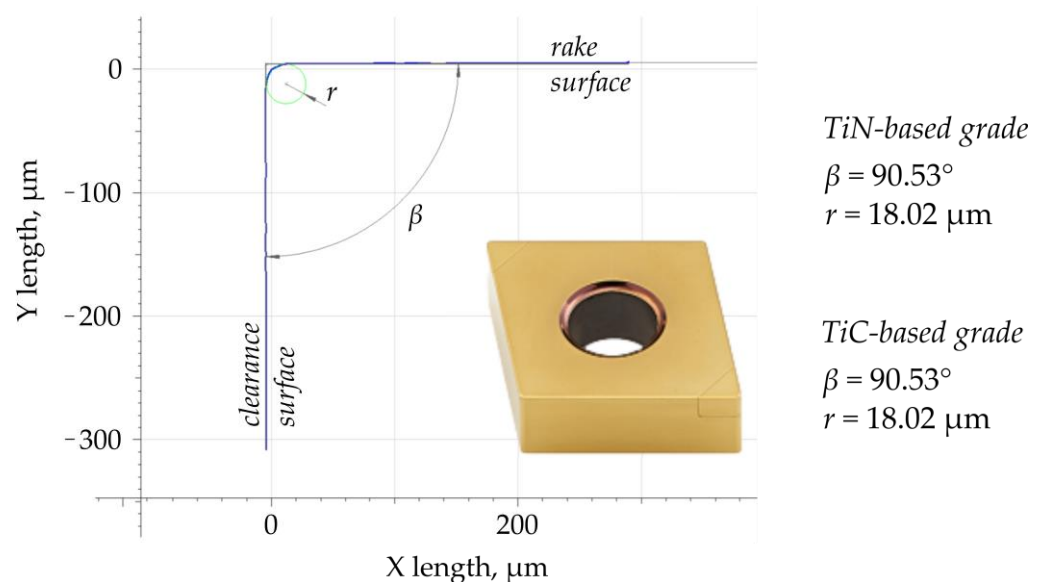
Overall geometry of the cutting insert (brazed tip construction) and edge radius measurement (at <0.05 mm from tool tip) of TiN-based and TiC-based PCBN inserts.
